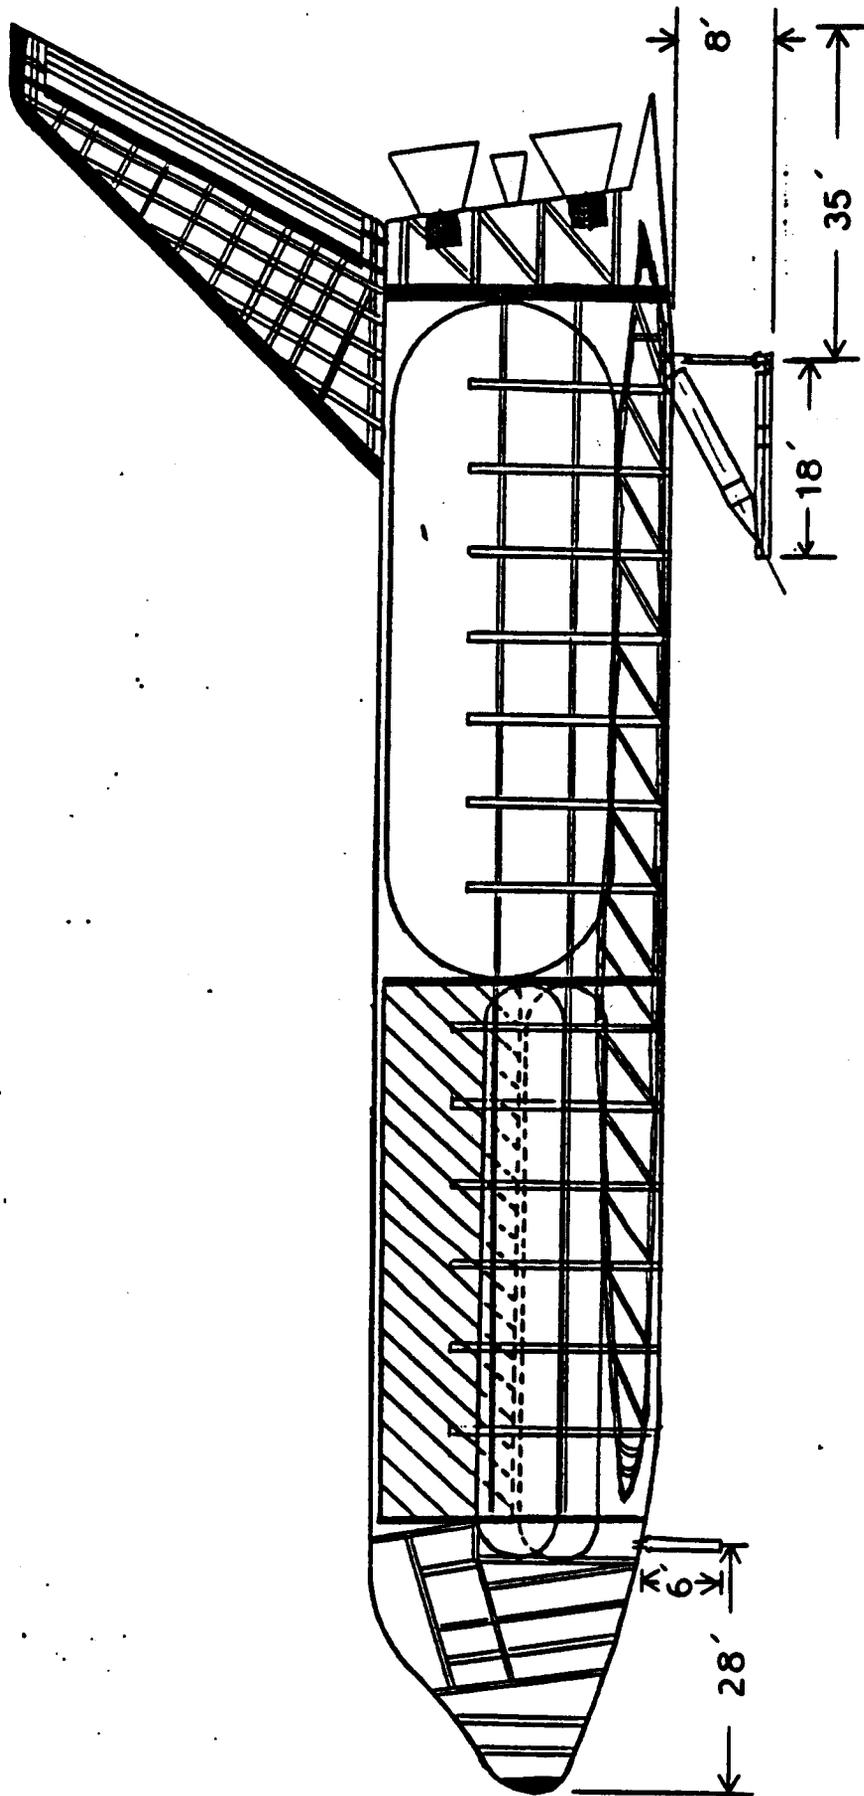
SIDE CUTAWAY VIEW OF STRUCTURES
